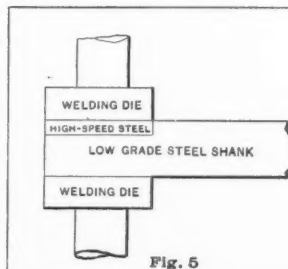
Position of Parts to be welded relative to Welding Dies
